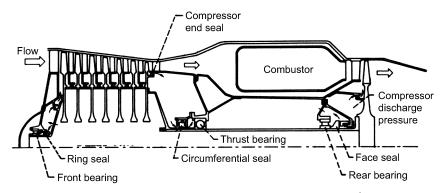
Engine schematic showing main-shaft seal locations.<sup>4</sup>
